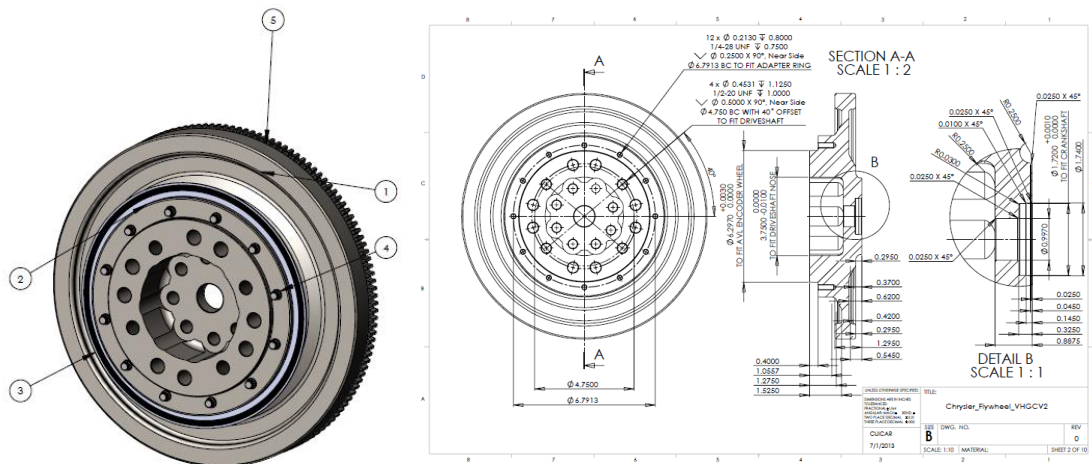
A custom flywheel was designed and built to connect the engine to the dynamometer driveshaft and hold the crank encoder disk.
